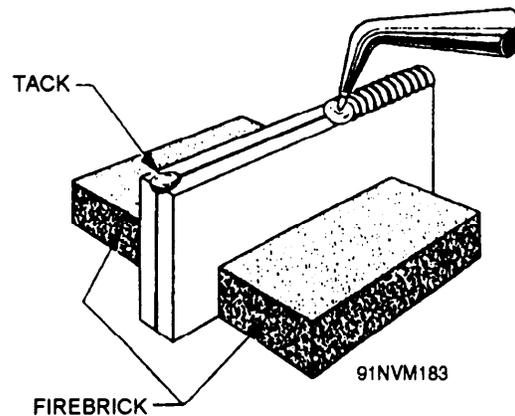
Bead weld without filler, used to join two pieces along an edge.
